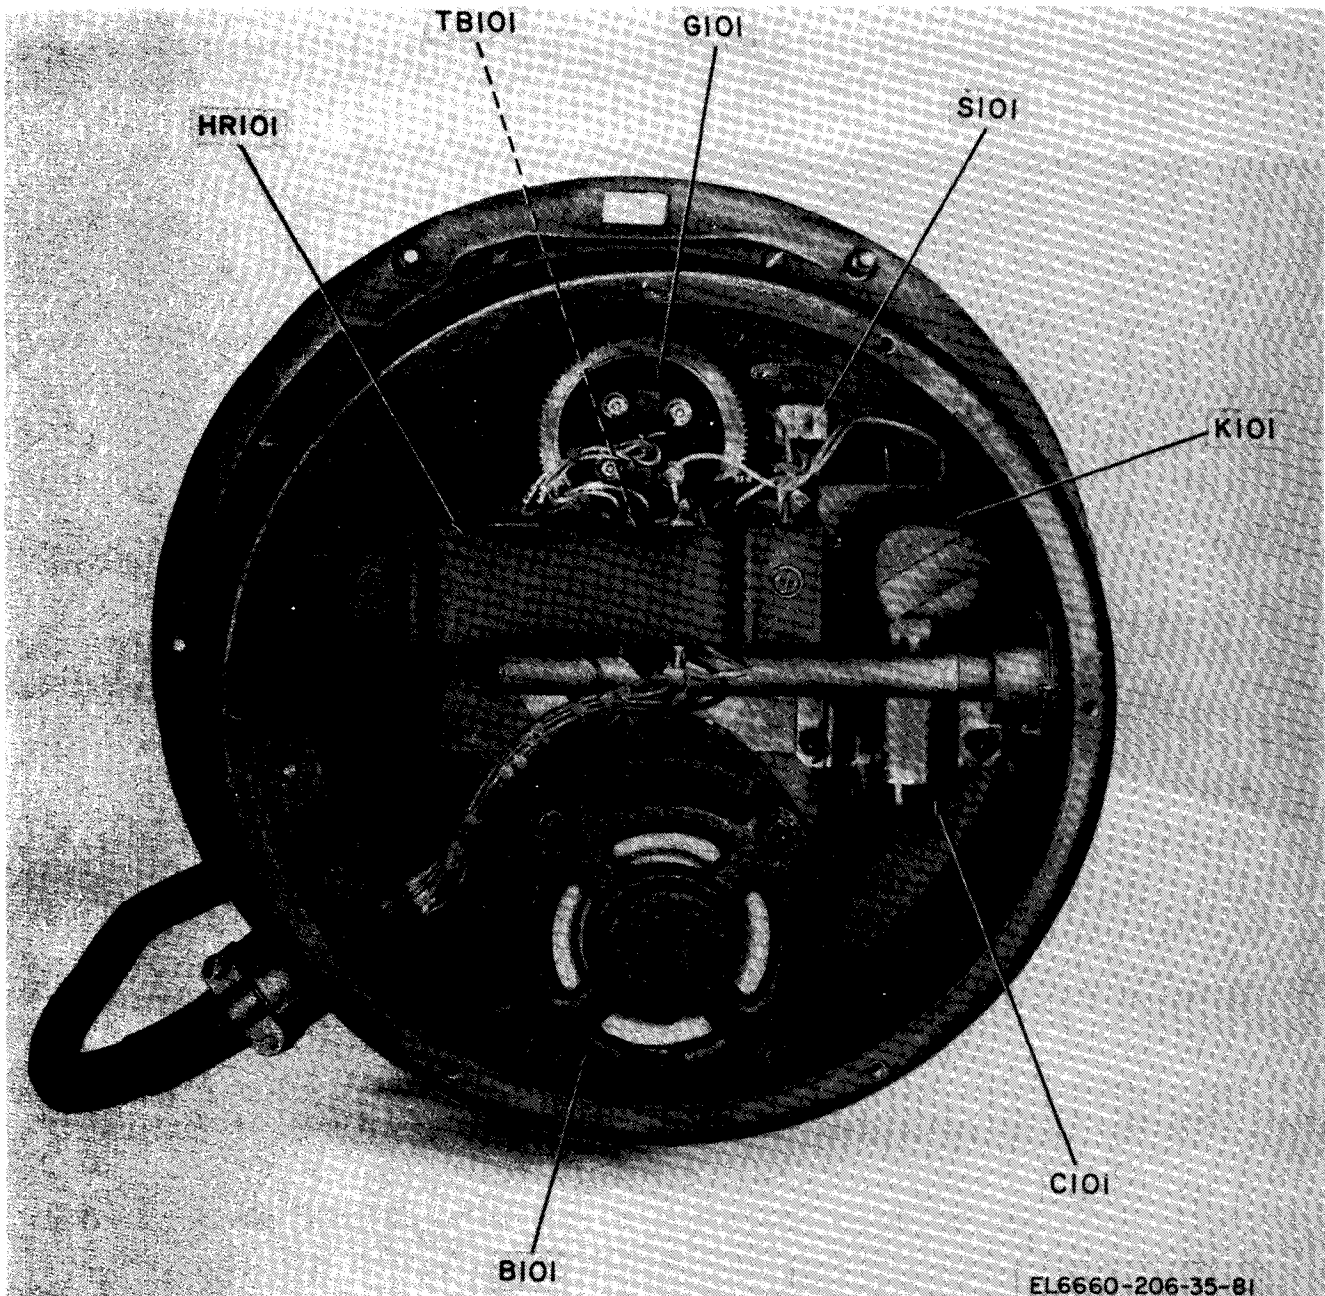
Antenna scanner assembly (AN/GMD-1B), cover removed.
